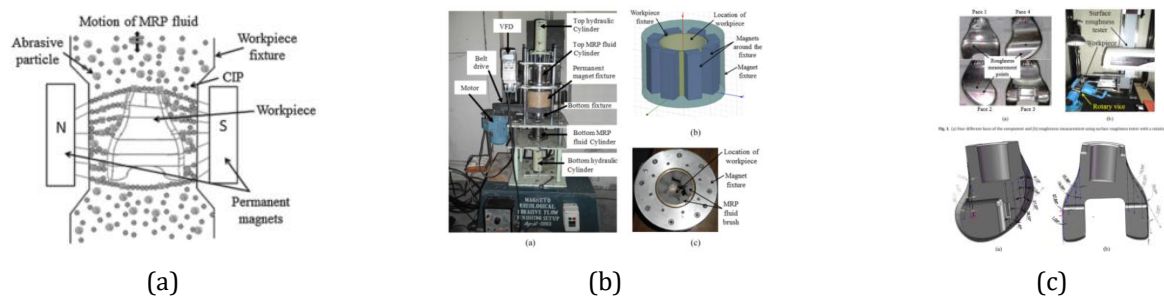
(a) Mechanism, (b) Set-up, (c) Workpiece and measurement point [44].
